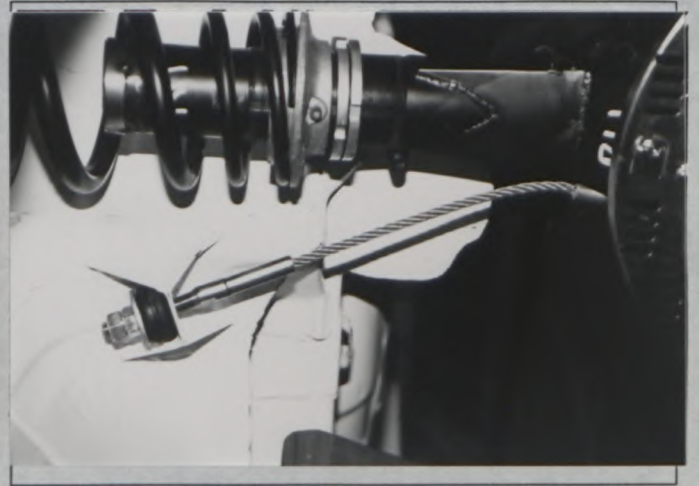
FRONT REINFORCED TOP MOUNTING PLATES
